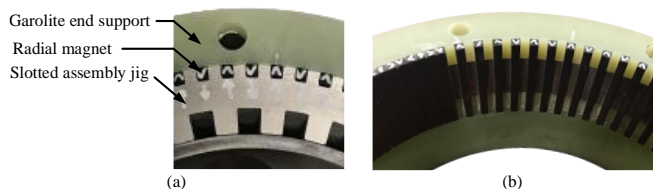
Slotted outer rotor magnet assembly jig, (b) slots between radial magnets for tangential magnets assembly.
